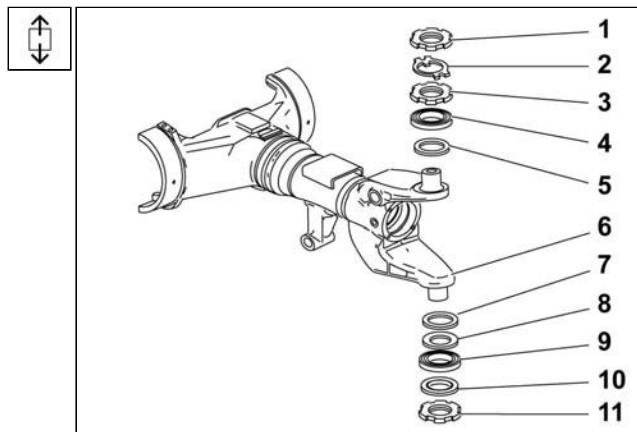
Bearings of axle shaft yoke swivel pin - removal
